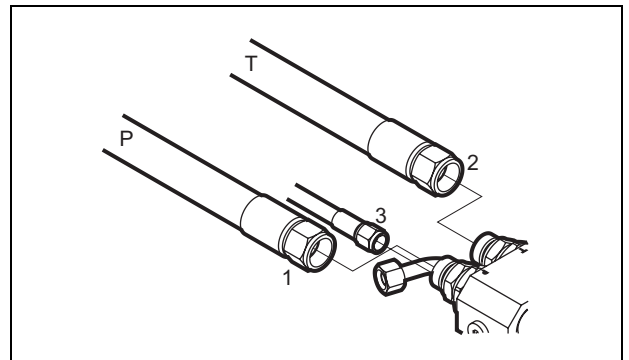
Assemble the hydraulic hoses to the saw motor manifold
